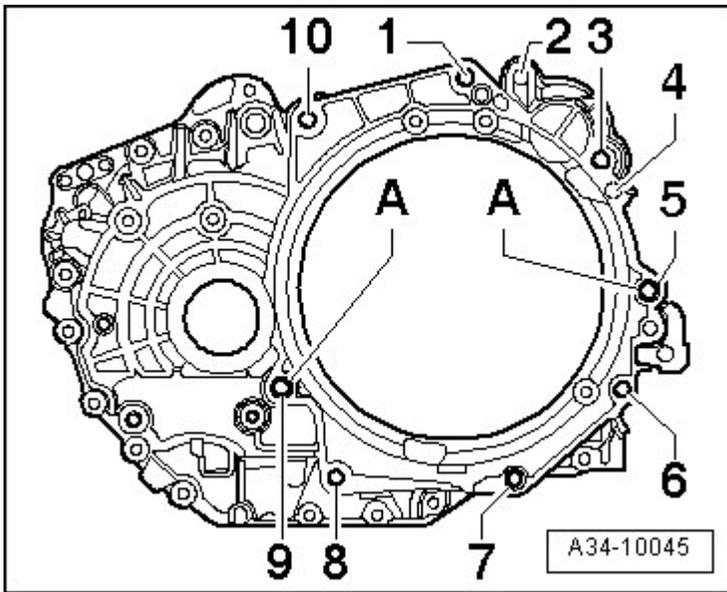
Identifying Direct Shift Automatic Transmission To Engine Mounting Bolts
